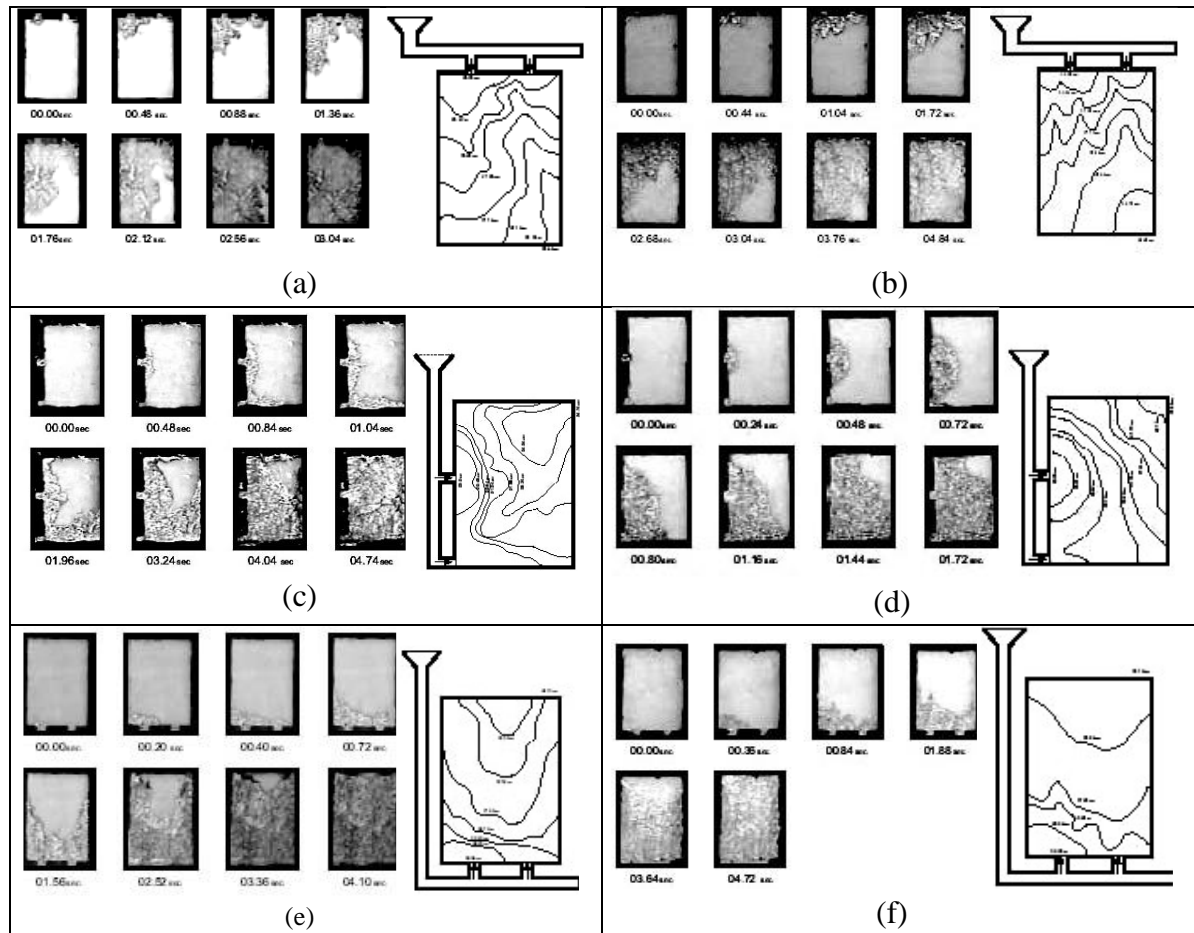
Mold filling behaviour in the top gating system with mold thickness (a) 5 mm and (b) 10 mm, Mold filling behaviour in the side gating system with mold thickness (c) 5 mm and (d) 10 mm, Mold filling behaviour in the bottom gating system with mold thickness (e) 5 mm and (f) 10 mm, [Y. H. K. Kharrazi et. al.]
